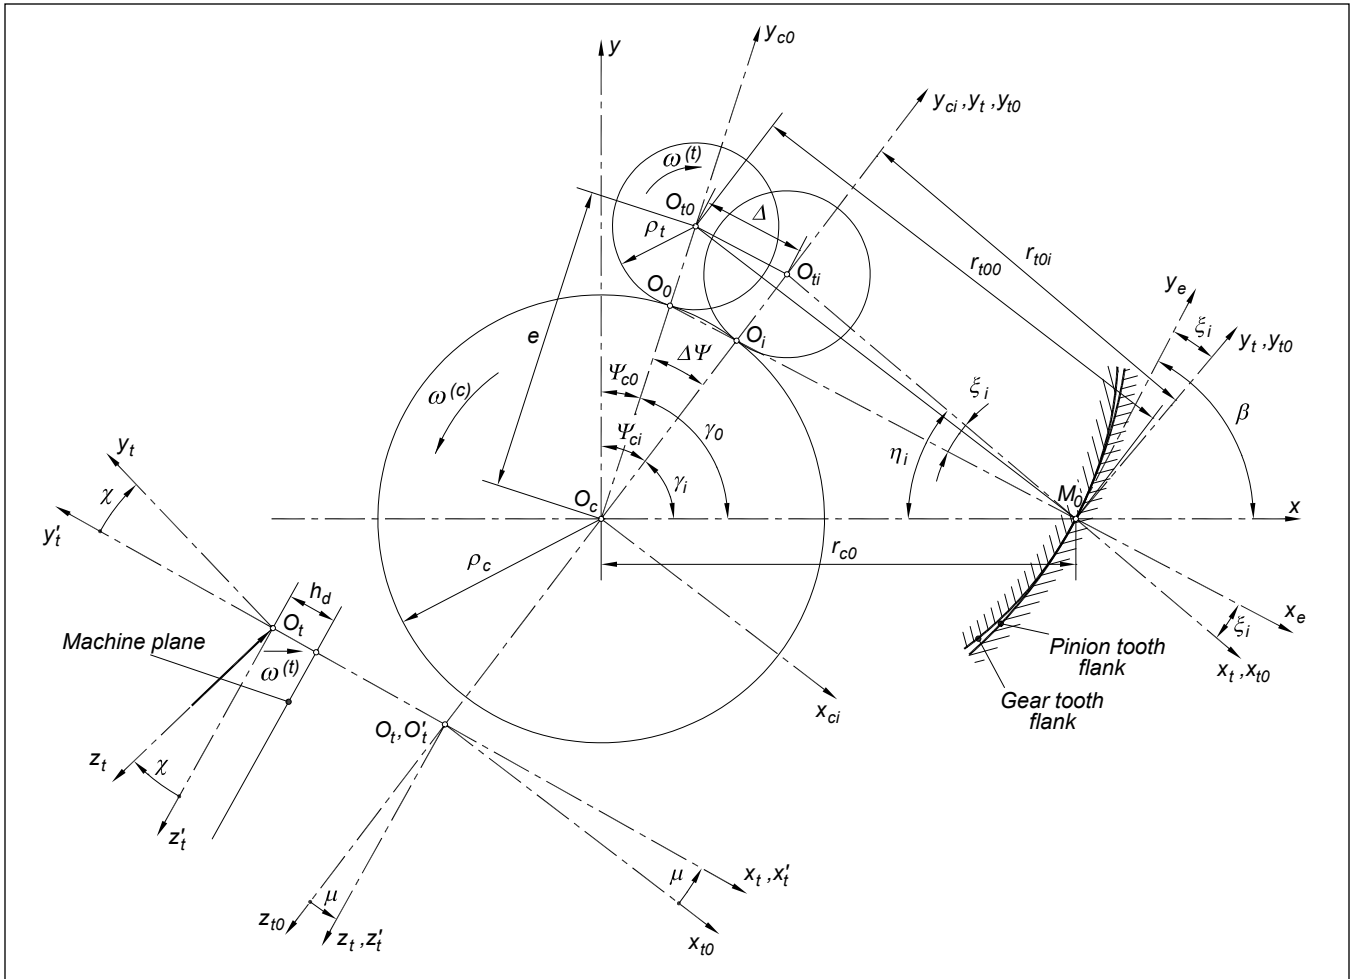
Relative position between the head cutter and the imaginary generating crown gear.
